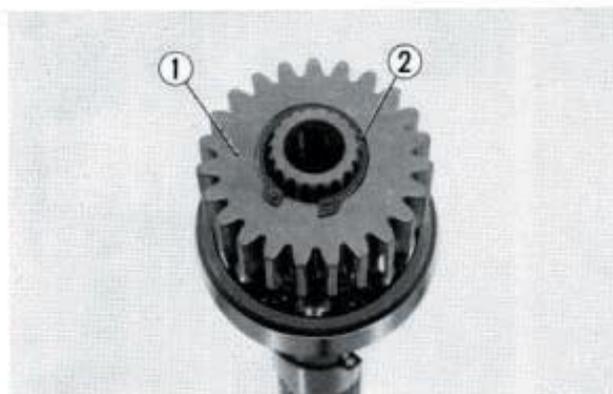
① Primary drive gear ② 20 mm snap ring
